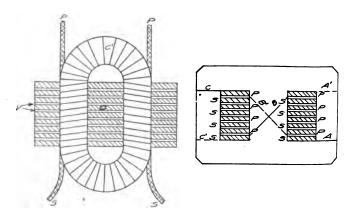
CROSS-SECTIONAL VIEW OF SHELL TYPE
